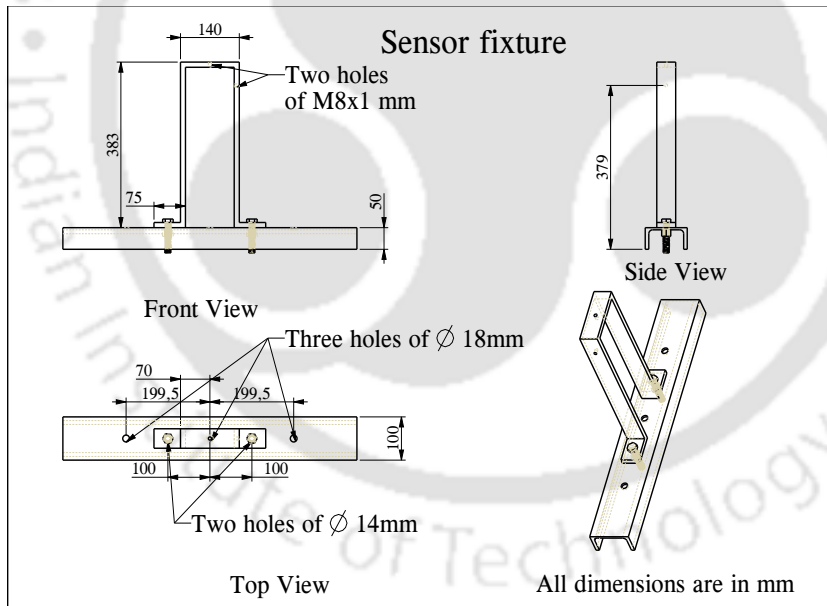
Dimensions of sensor fixture for the Location 6.
